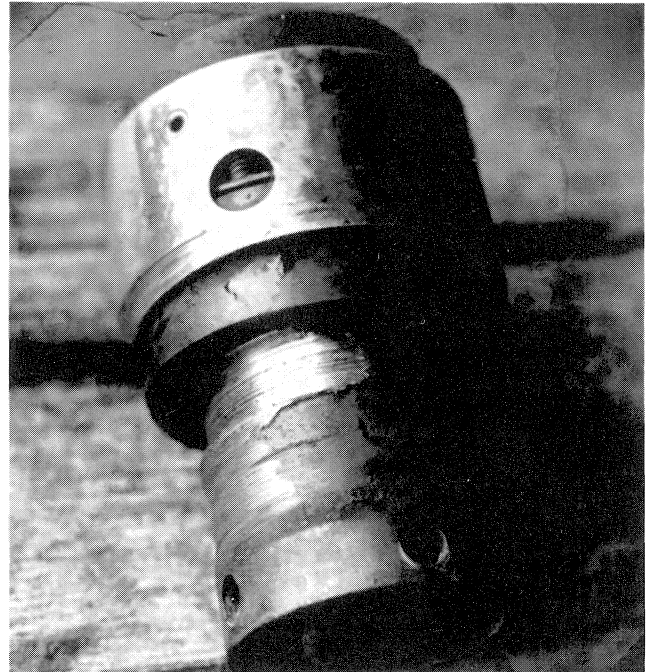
Mechanical Seal Assembly Showing Severe Rubbing.
